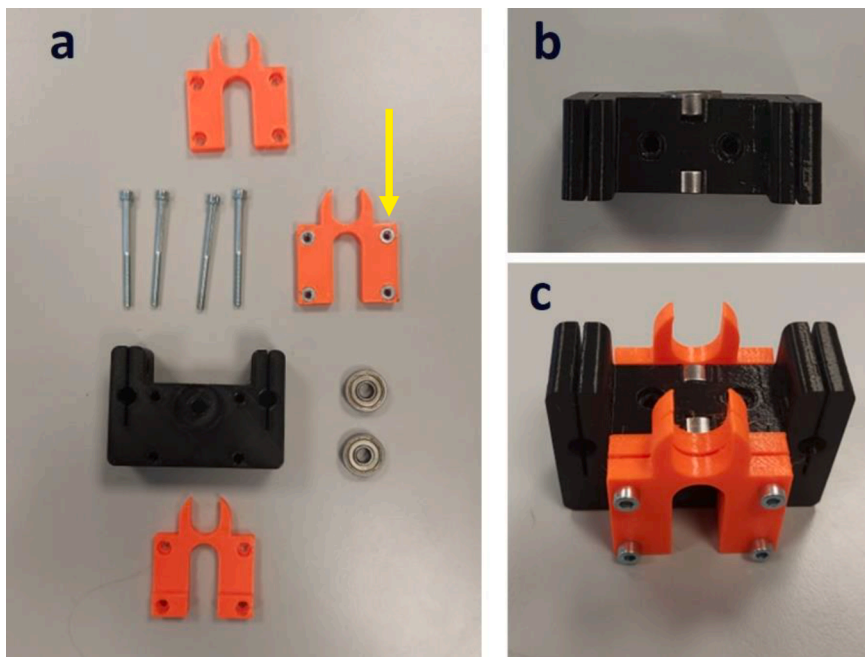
Lower part of the syringe pump assembly. (a) Exploded view of the components. (b) Miniature bearings were installed before the assembly with (c) syringe holders.
